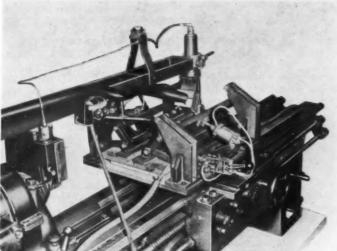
Early longitudinal welding machine as originally adapted for cylinder welding. This machine was later modified for development work. (See Fig. 2.)
